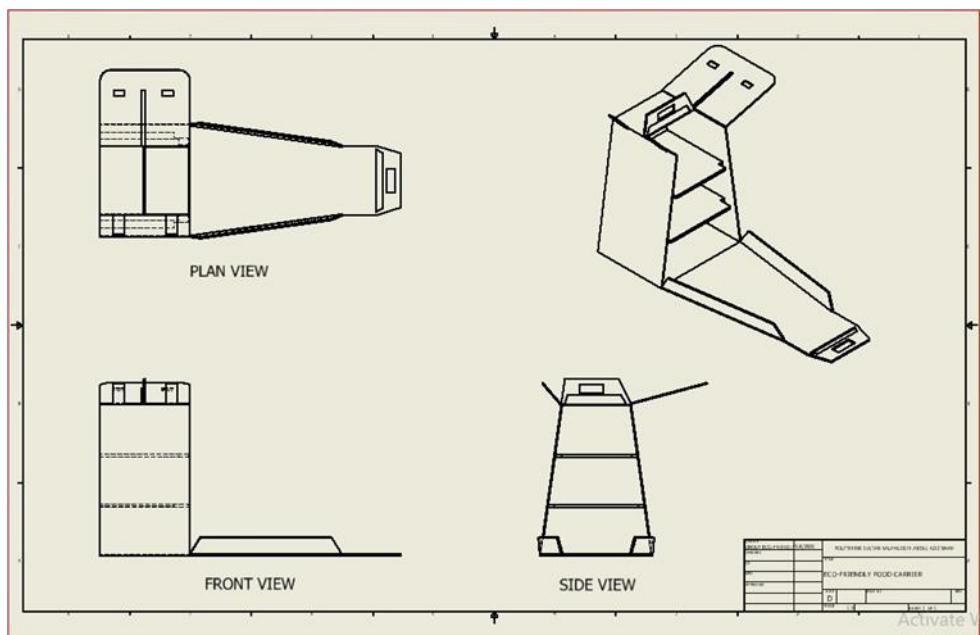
i : Drawing Othography Plan, Front and Side View
